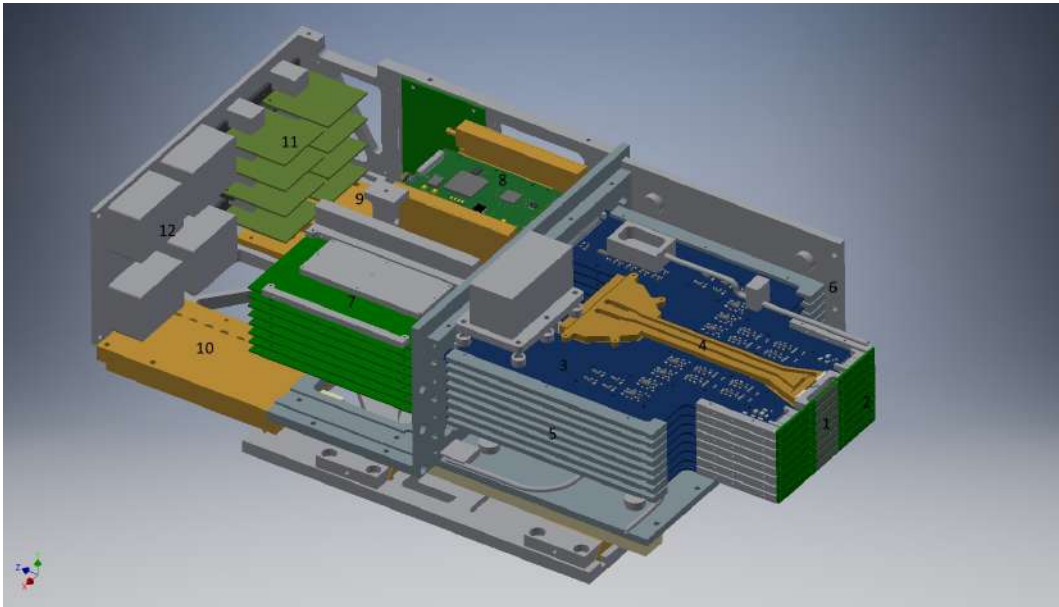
Detector system: (1) detectors, (2) detector PCB, (3) front-end PCBs, (4) brass profile with cooling liquid flowing inside, (5) insertion guides at flanks of detecting heads, (6) rails for eight detection heads, (7) power supply and filters PCBs, (8) back-end PCBs, (9) inlet cooling distribution, (10) outlet cooling distribution, (11) ethernet PCBs, (12) power supply connectors [66].
